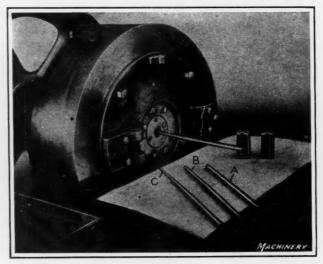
Experimental Job performed on 7/16-inch Cold-drawn Stock, and Type of Dies used
